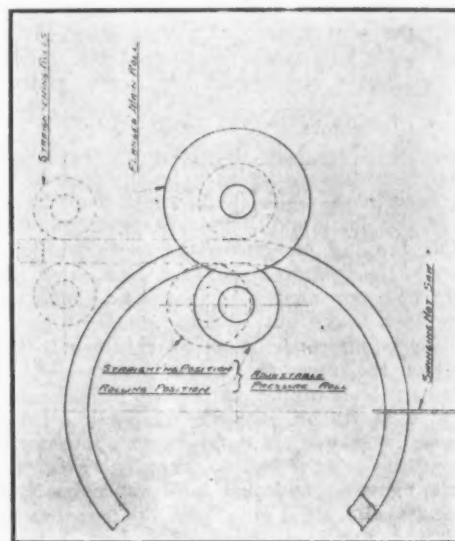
One Method of Splitting and Straightening the Circular Bloom on the Mill Immediately After Rolling to Size
